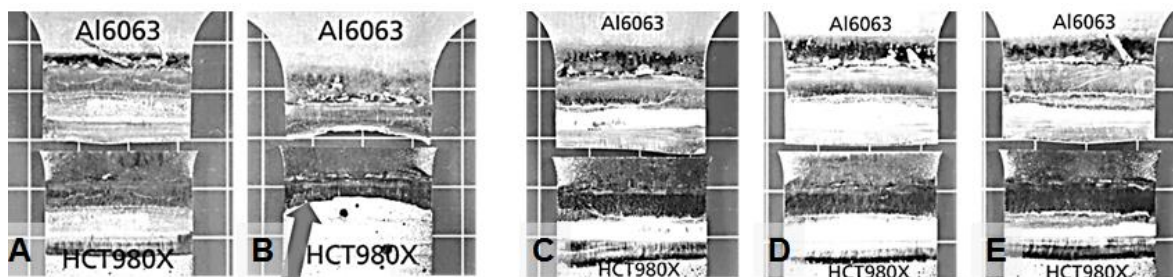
Failed lap-shear samples with different failure modes at 0.02 m/s (A and B) with reproducible failure mode in the welding zone at 3 m/s loading speed (C-E). The view is on the welded sides of the blank, the contact surfaces.
